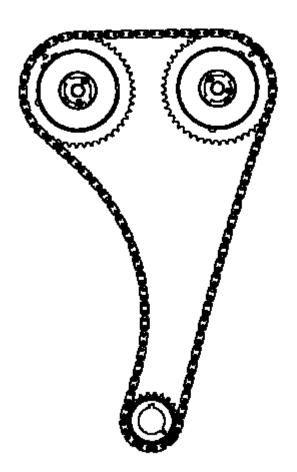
Identifying Cam Actuator, Camshaft & Chain Courtesy of GENERAL MOTORS CORP.
